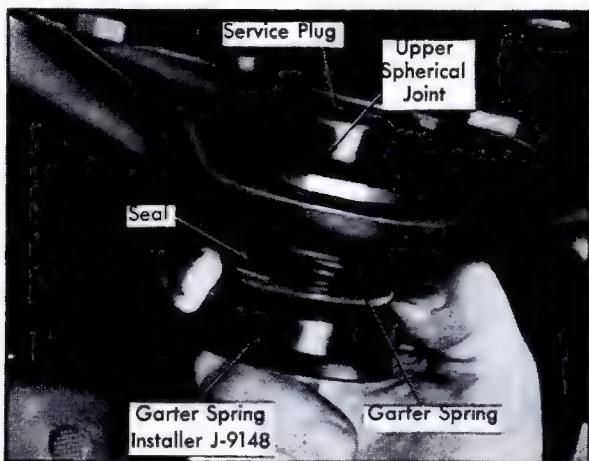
Installing Spring on Upper Spherical Joint Seal
